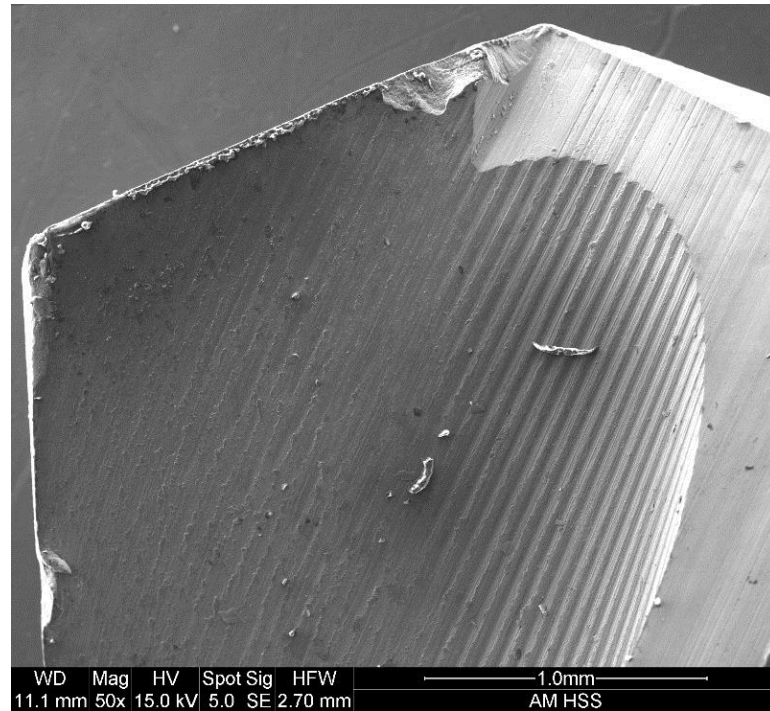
50x SEM flute view of cutting edge HSS drill bit after drilling 60 holes in AM titanium.
